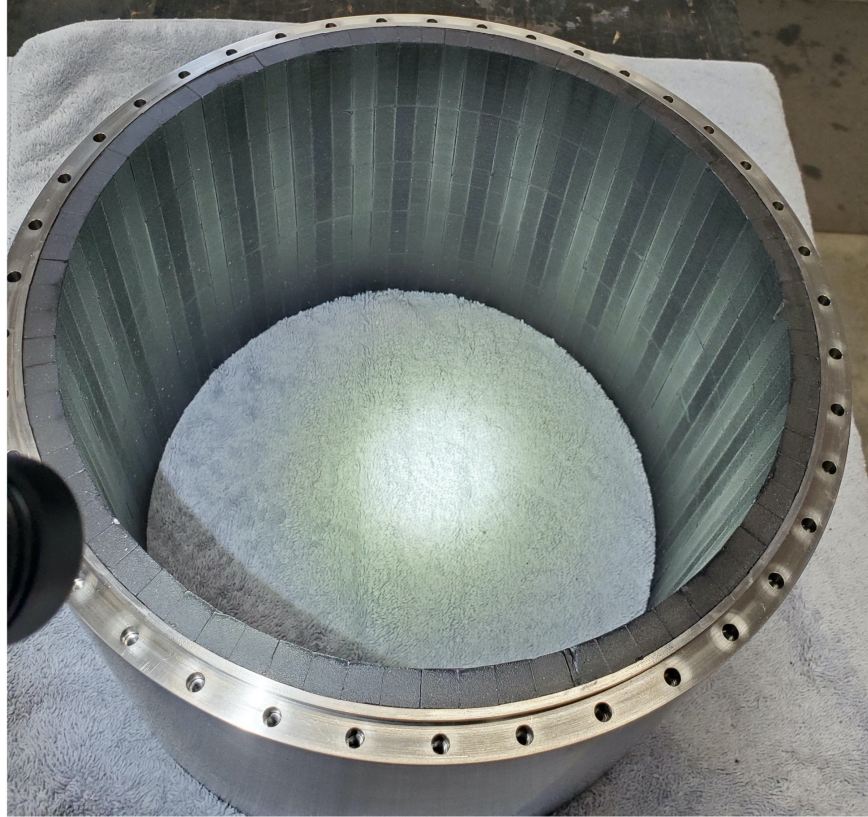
Manufactured Halbach array rotor with titanium rim to retain magnets instead of rotor back iron.
